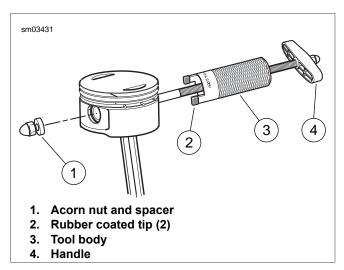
Removing Piston Pin with HD-42320-A Piston Pin Remover
